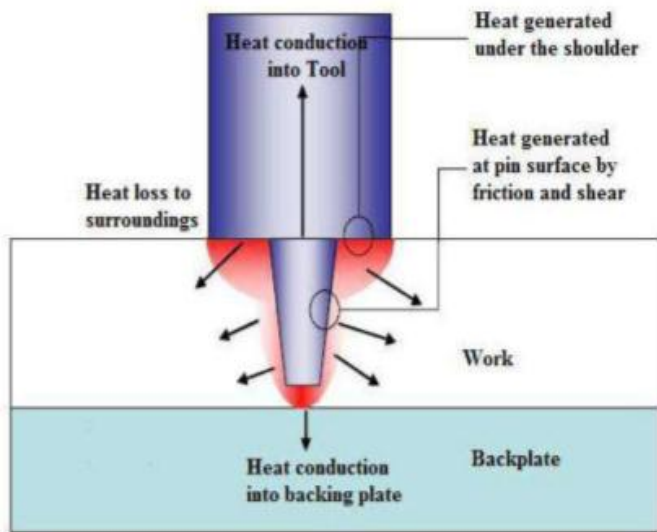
Heat flow during Friction stir welding [2].
